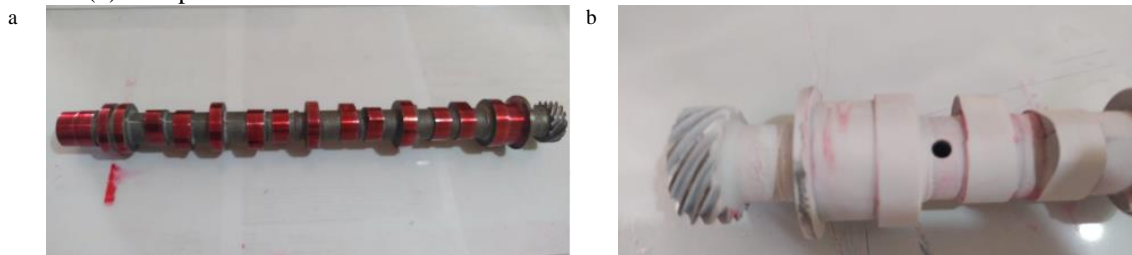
(a) Camshaft with penetrating ink (b) Test applied to cams and supports
